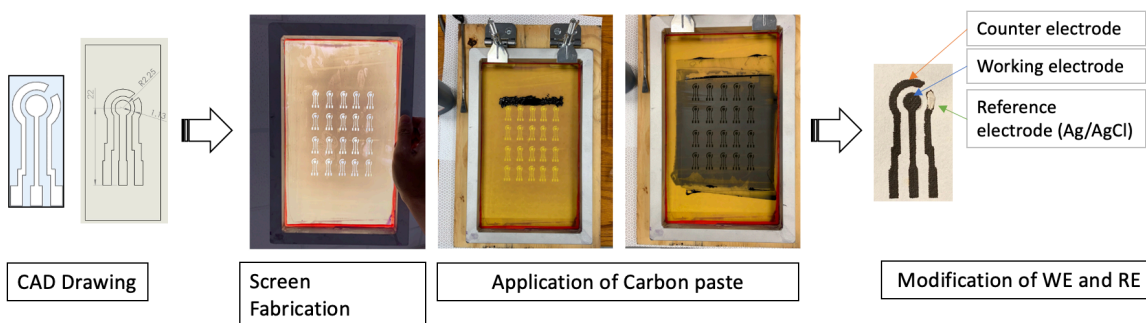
Fabrication of three-electrode system by screen printing. Sample (right) is printed on #1 filter paper.
